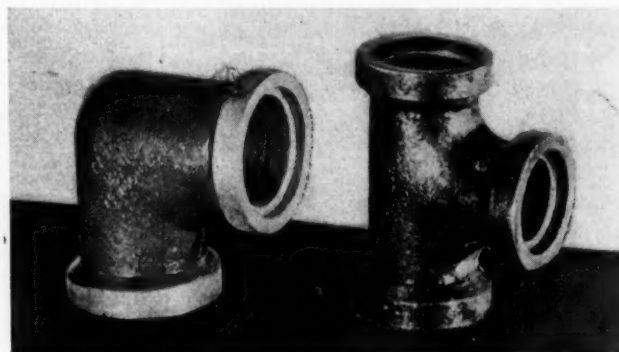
Socket-welding fittings, elbow and tee
